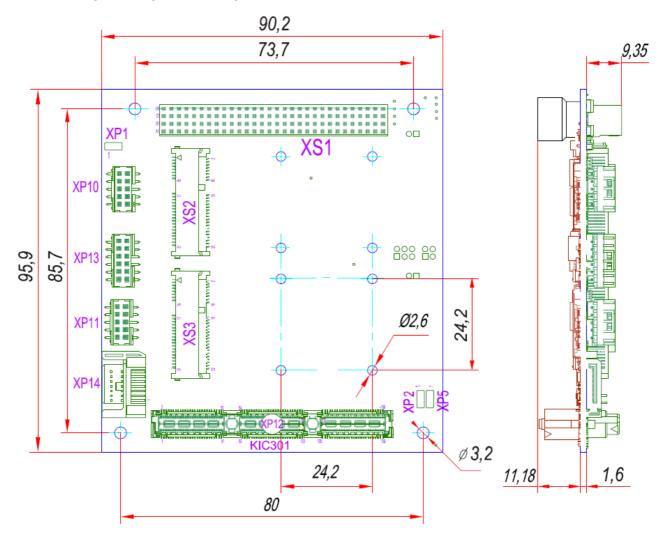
Location of KIC301-01 connectors on the top side and side view
